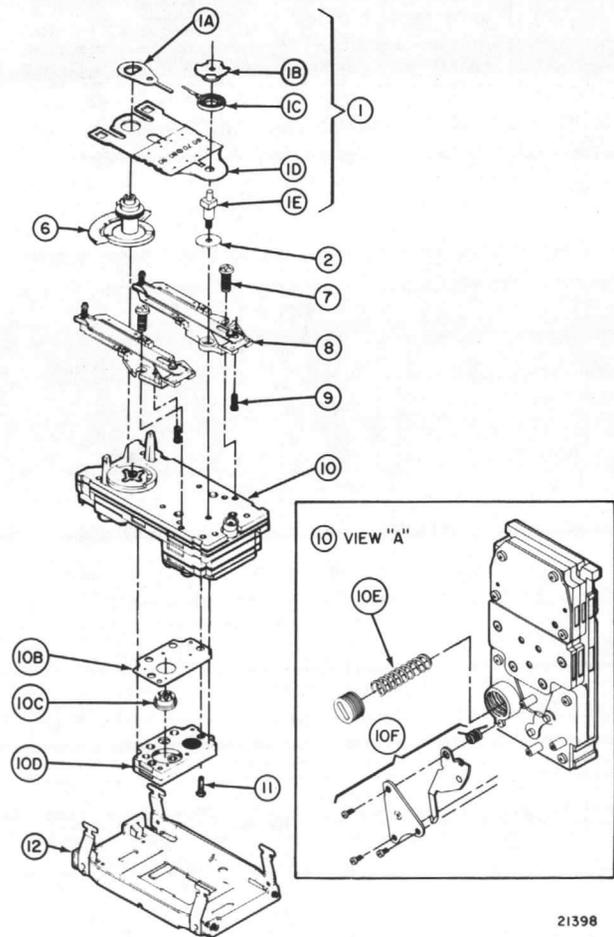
Dual Element Thermostat Exploded View Showing Repair Parts and Assemblies.
